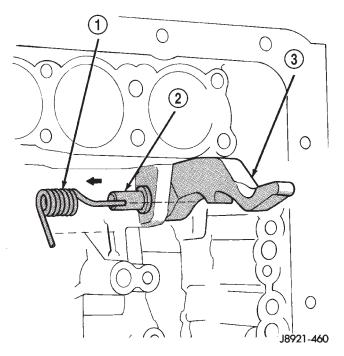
Removing/Installing Park Pawl, Pin And Spring
